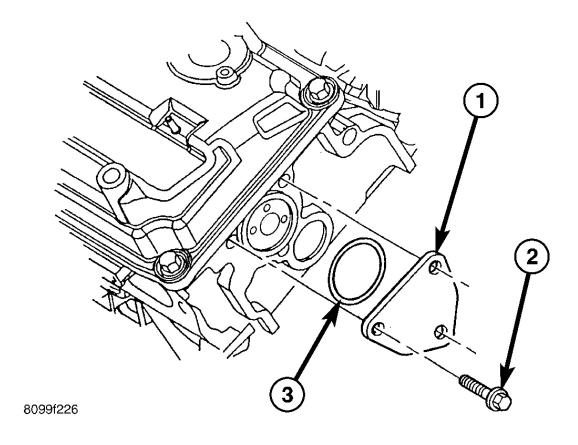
Camshaft Thrust Plate, Bolt & O-Ring Courtesy of CHRYSLER LLC
